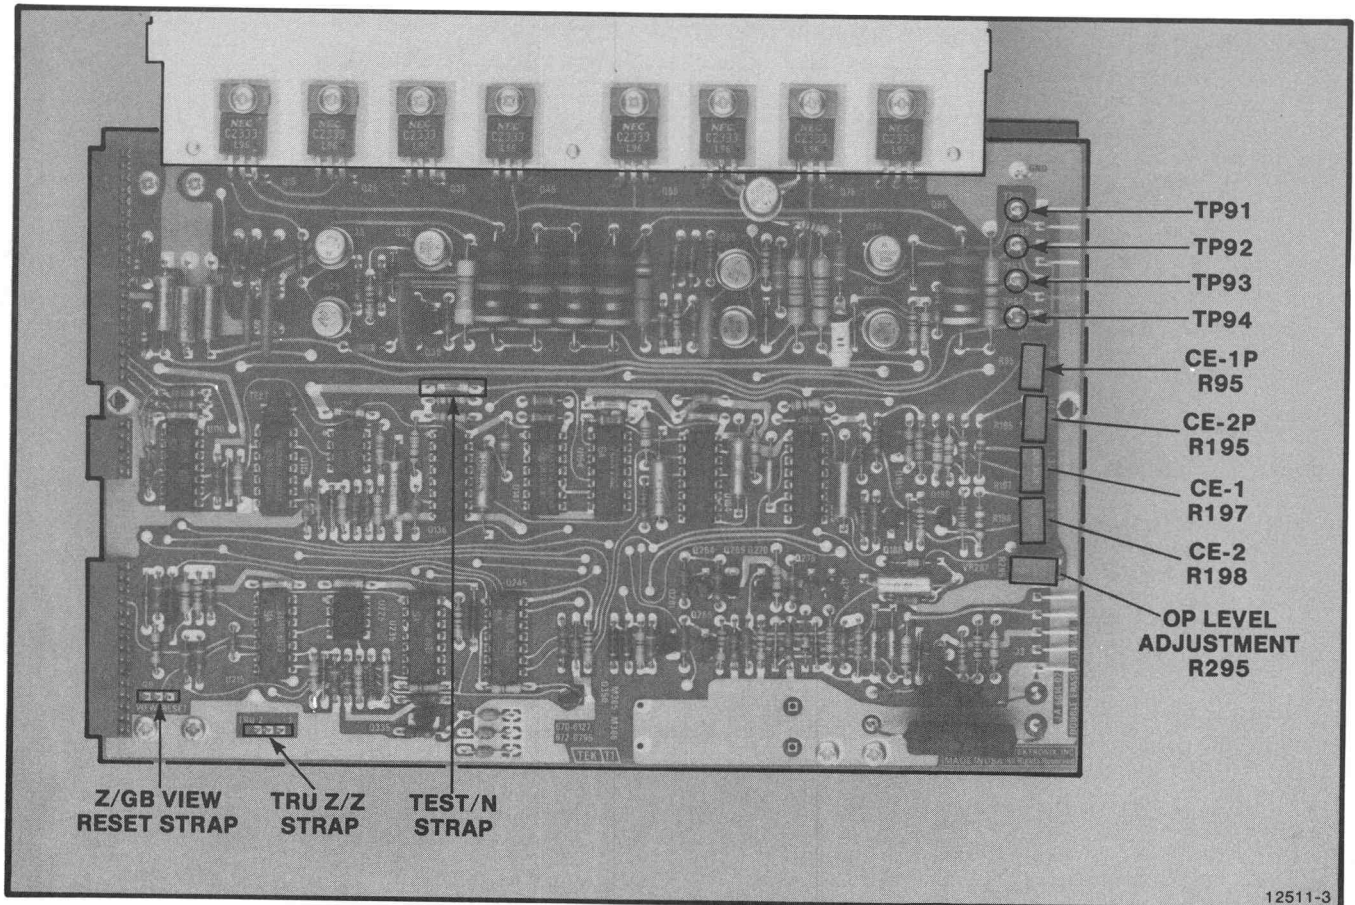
Storage Board Adjustments, Straps and Test Points.
